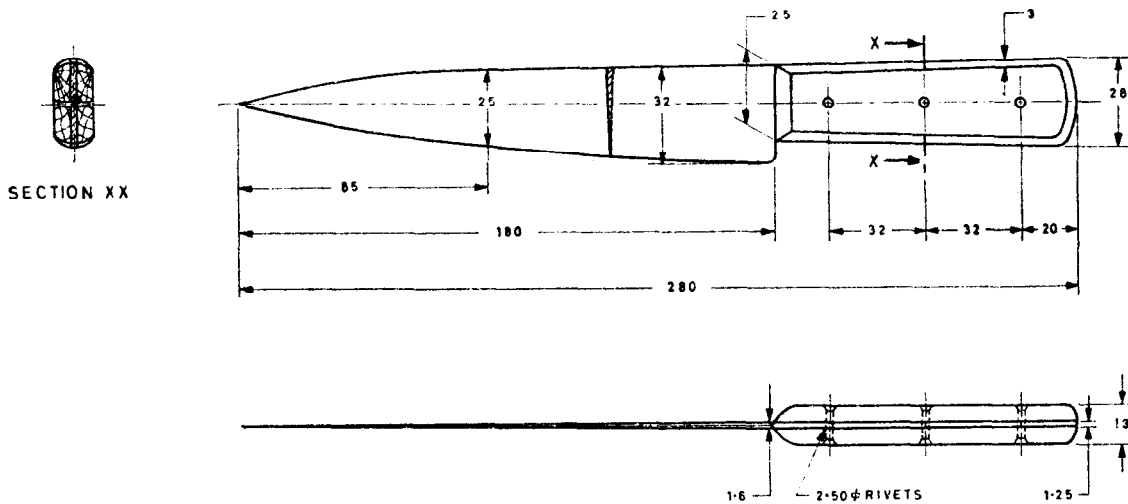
BUTCHER'S FLAYING KNIFE, SMALL
